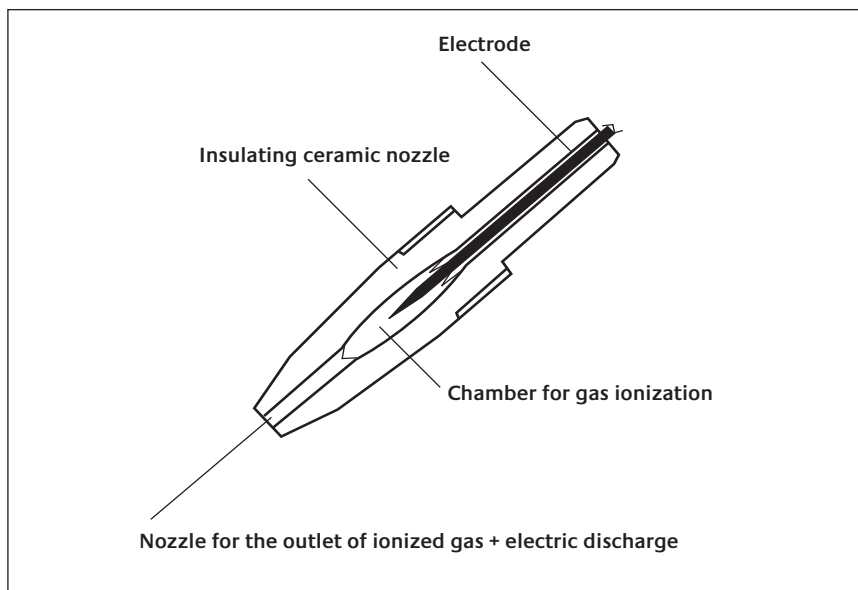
Welding nozzle for plasma gas electric discharge welding
